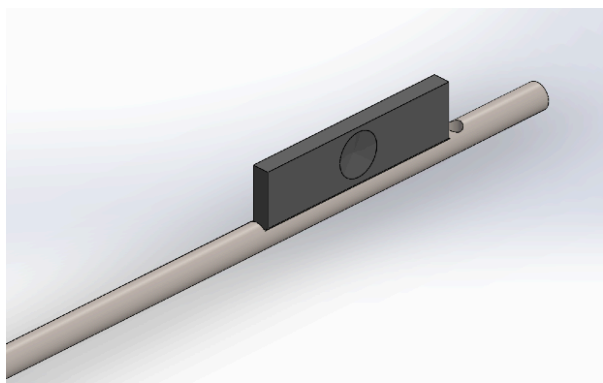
The pressing part used to compress the sample powder inside the indent of the sample rod.
